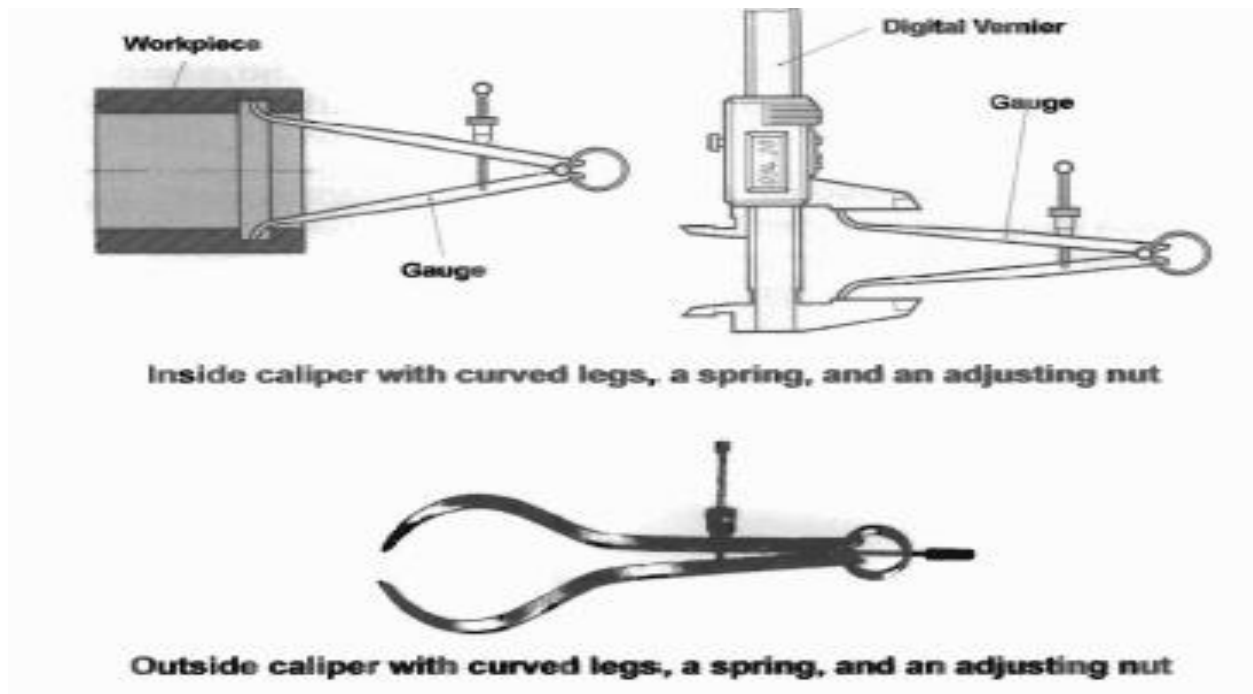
Calipers (A . inside caliper B. outside caliper)
